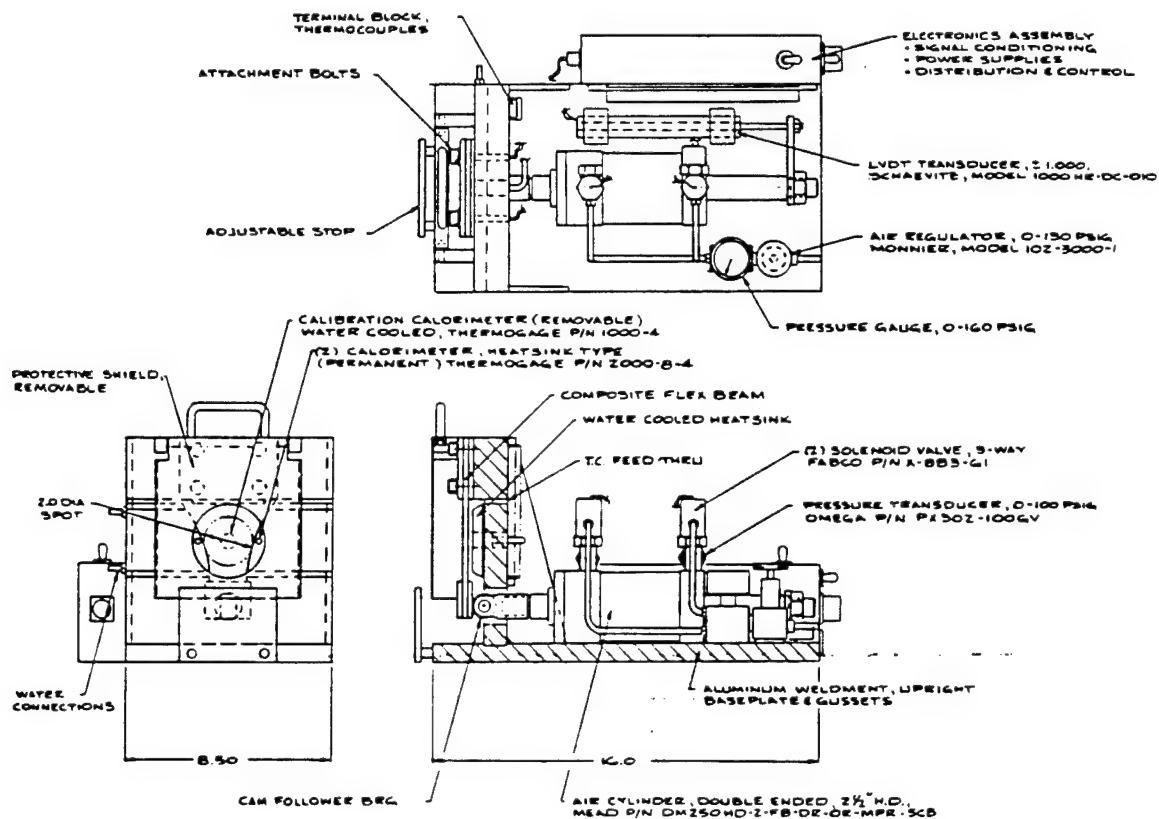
Combined thermal-mechanical test fixture assembly drawing.
